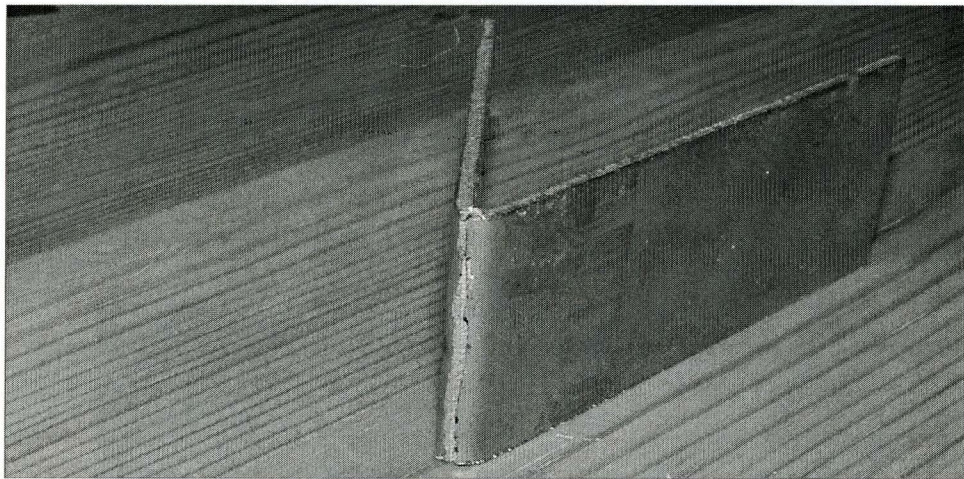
Example of the DP980 experimental samples bent in the commercial bending machine, showing fracture at the apex of the bend.
